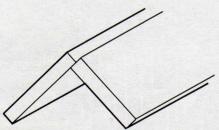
Half open corner joint. Penetration quite difficult. May require welding in the inside for full strength.
